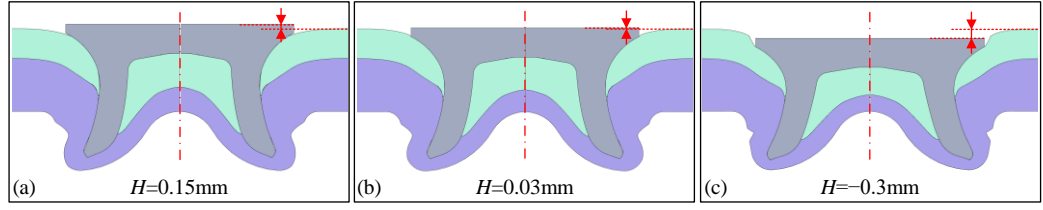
Cross-sectional profiles of SPR joints with different rivet head heights
